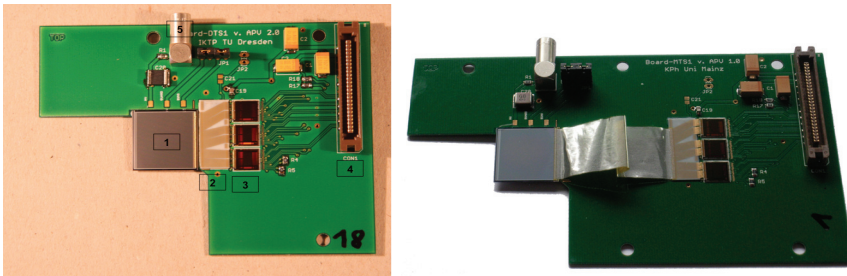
Overview of the old and new PCB prototypes. The two pictures on the top show a photograph of a sensor module equipped to perform a double sided readout of the sensor(1) consisting of a PCB. Main components of each board are:(2) pitch adapter;(3) APV25 front-ends; (4) high density connector. The detector bias voltage (5) is supplied via one board. The picture on the right panel shows a modified board to enable the connexion to a flexible ultra-thin cable(See Fig. 5).
